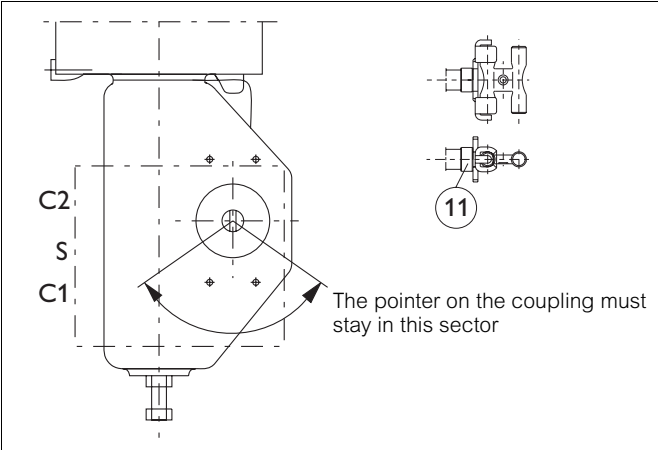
Mounting on Metso actuator with VDI/VDE mounting face
